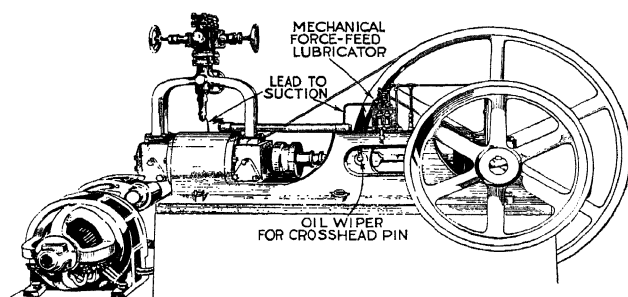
Small carbon dioxide compressor with mechanical-force feed to bearings and cylinder. (Courtesy Socony-Vacuum Oil Co.)
